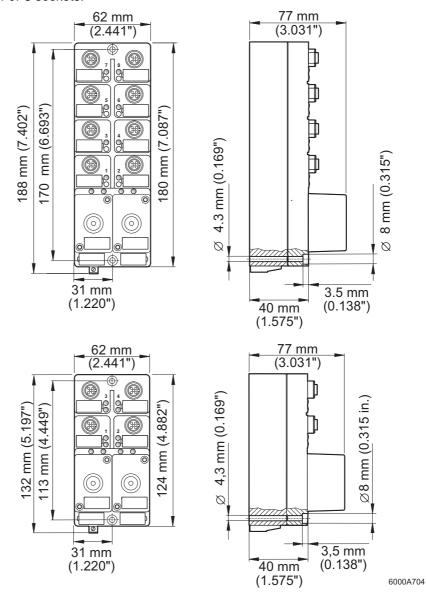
Dimensions of an SAB with 8 or 4 sockets
